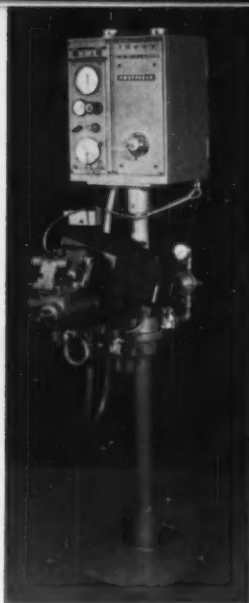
A "postprocess" gage for a single dimension. A gage of this type invariably incorporates a "demand circuit" or presence-of-part switch to initiate the gaging cycle. When a part leaves the machine tool, it closes the switch, and the gage then goes through a complete automatic cycle.
